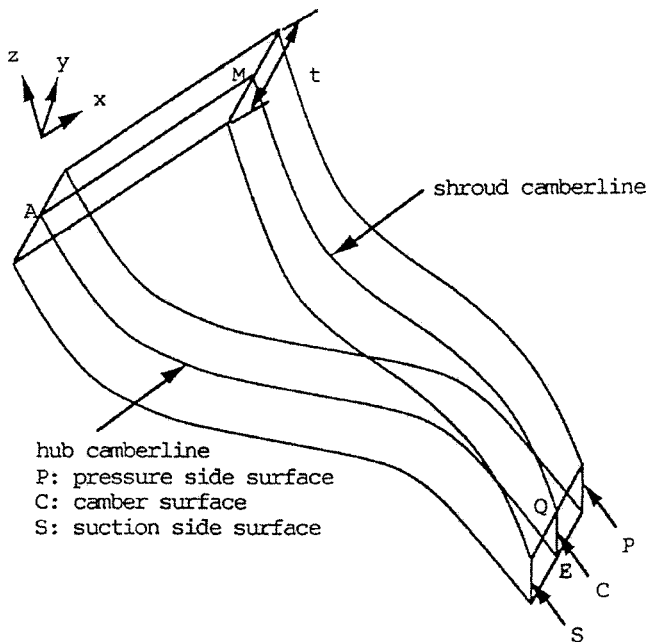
Schematic illustration of camber, pressure side, and suction side surfaces of an impeller
